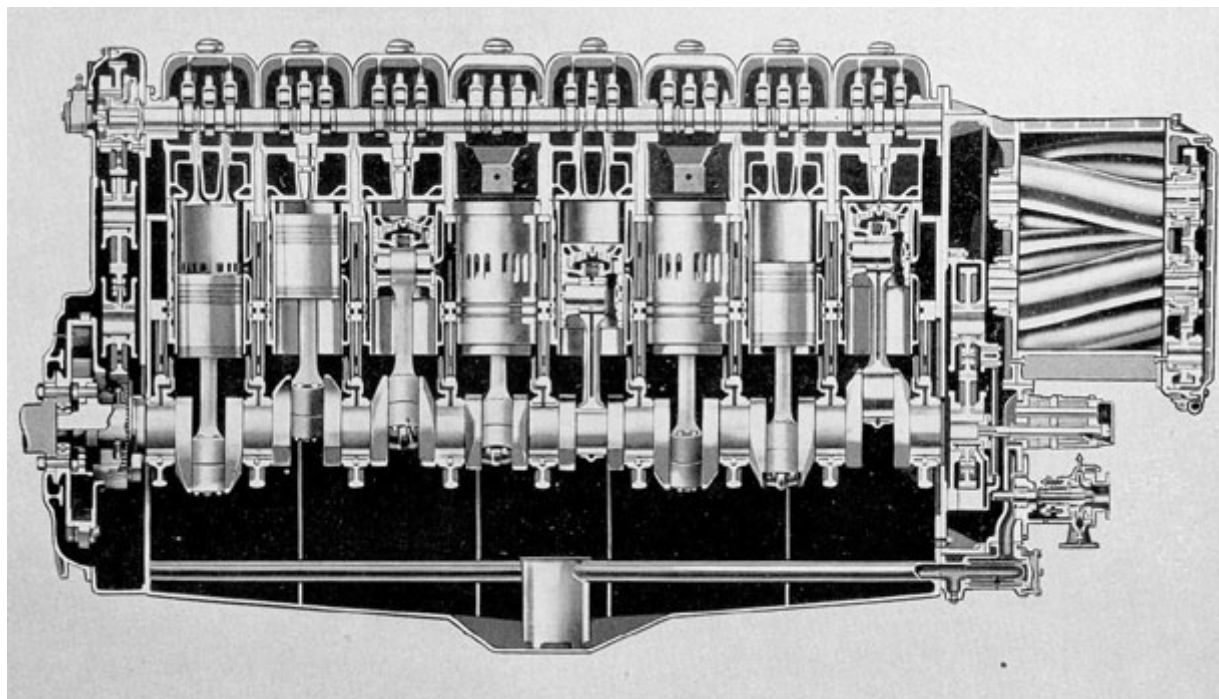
Longitudinal cross section of GM 8-268 auxiliary engine.
